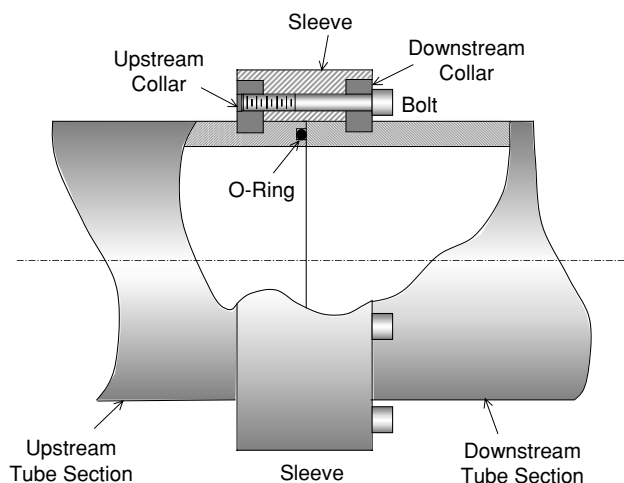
Weldless flange design for mating two driven-tube sections together.
